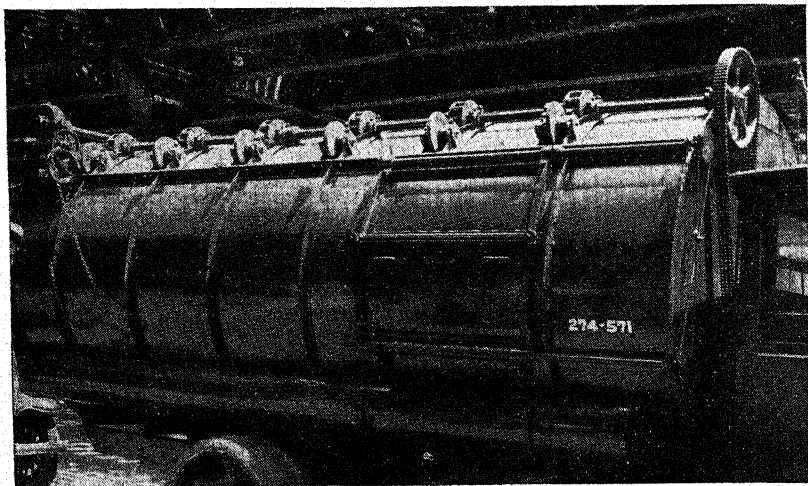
Arc welded compressor type refuse collection body.
